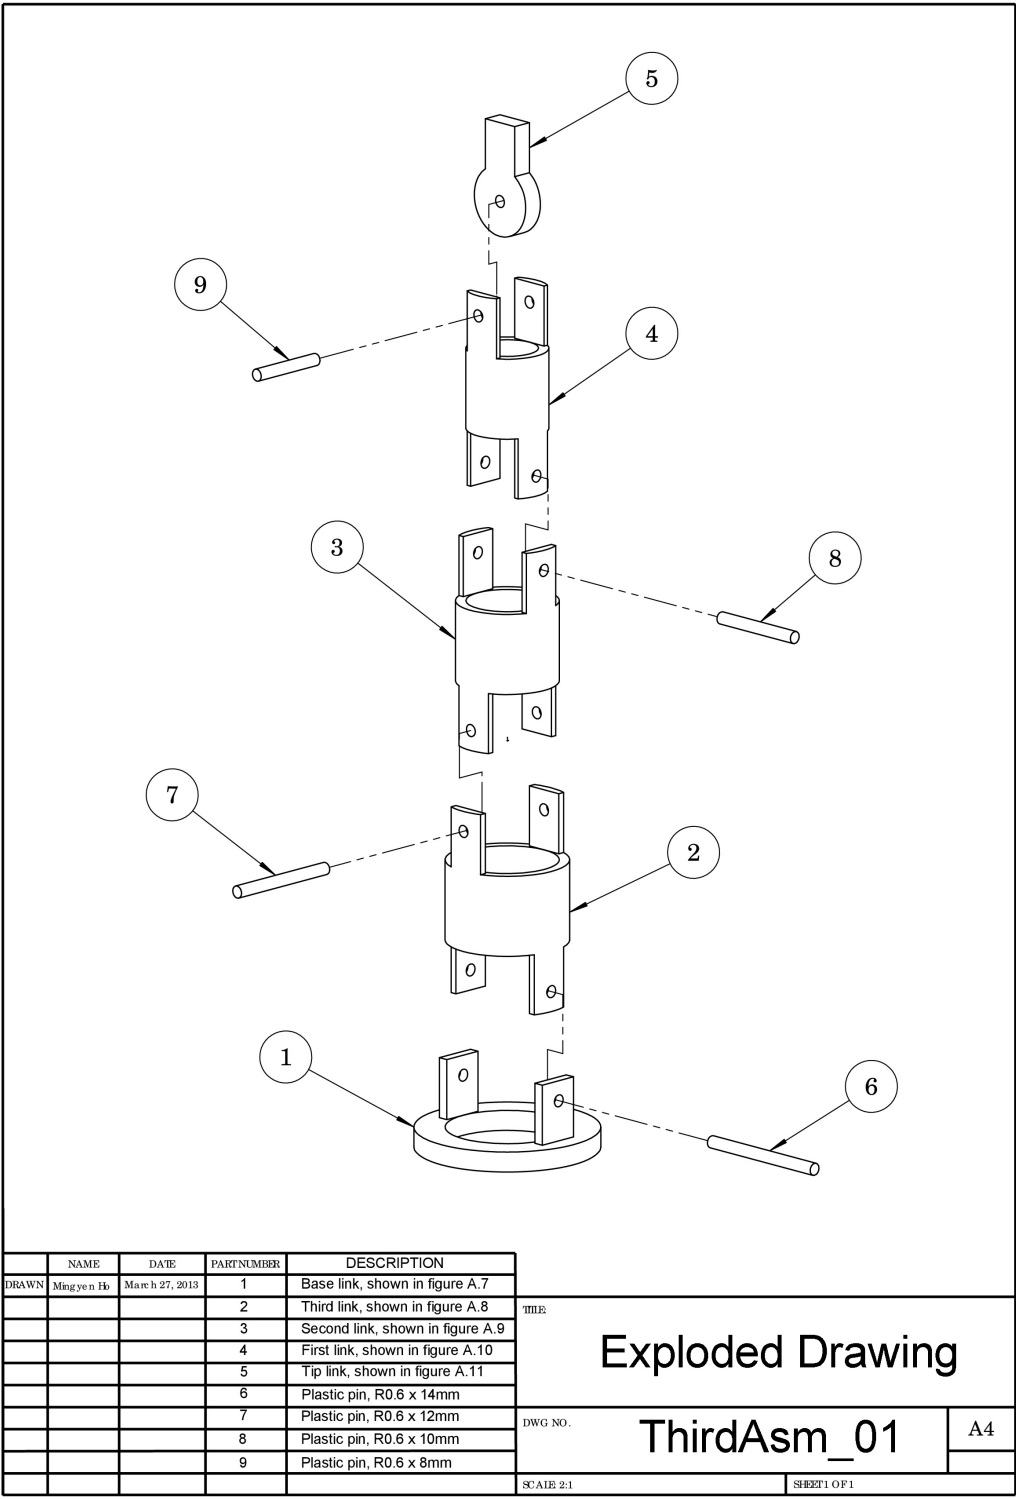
Exploded drawing of the SMA spring actuated MINIR.
